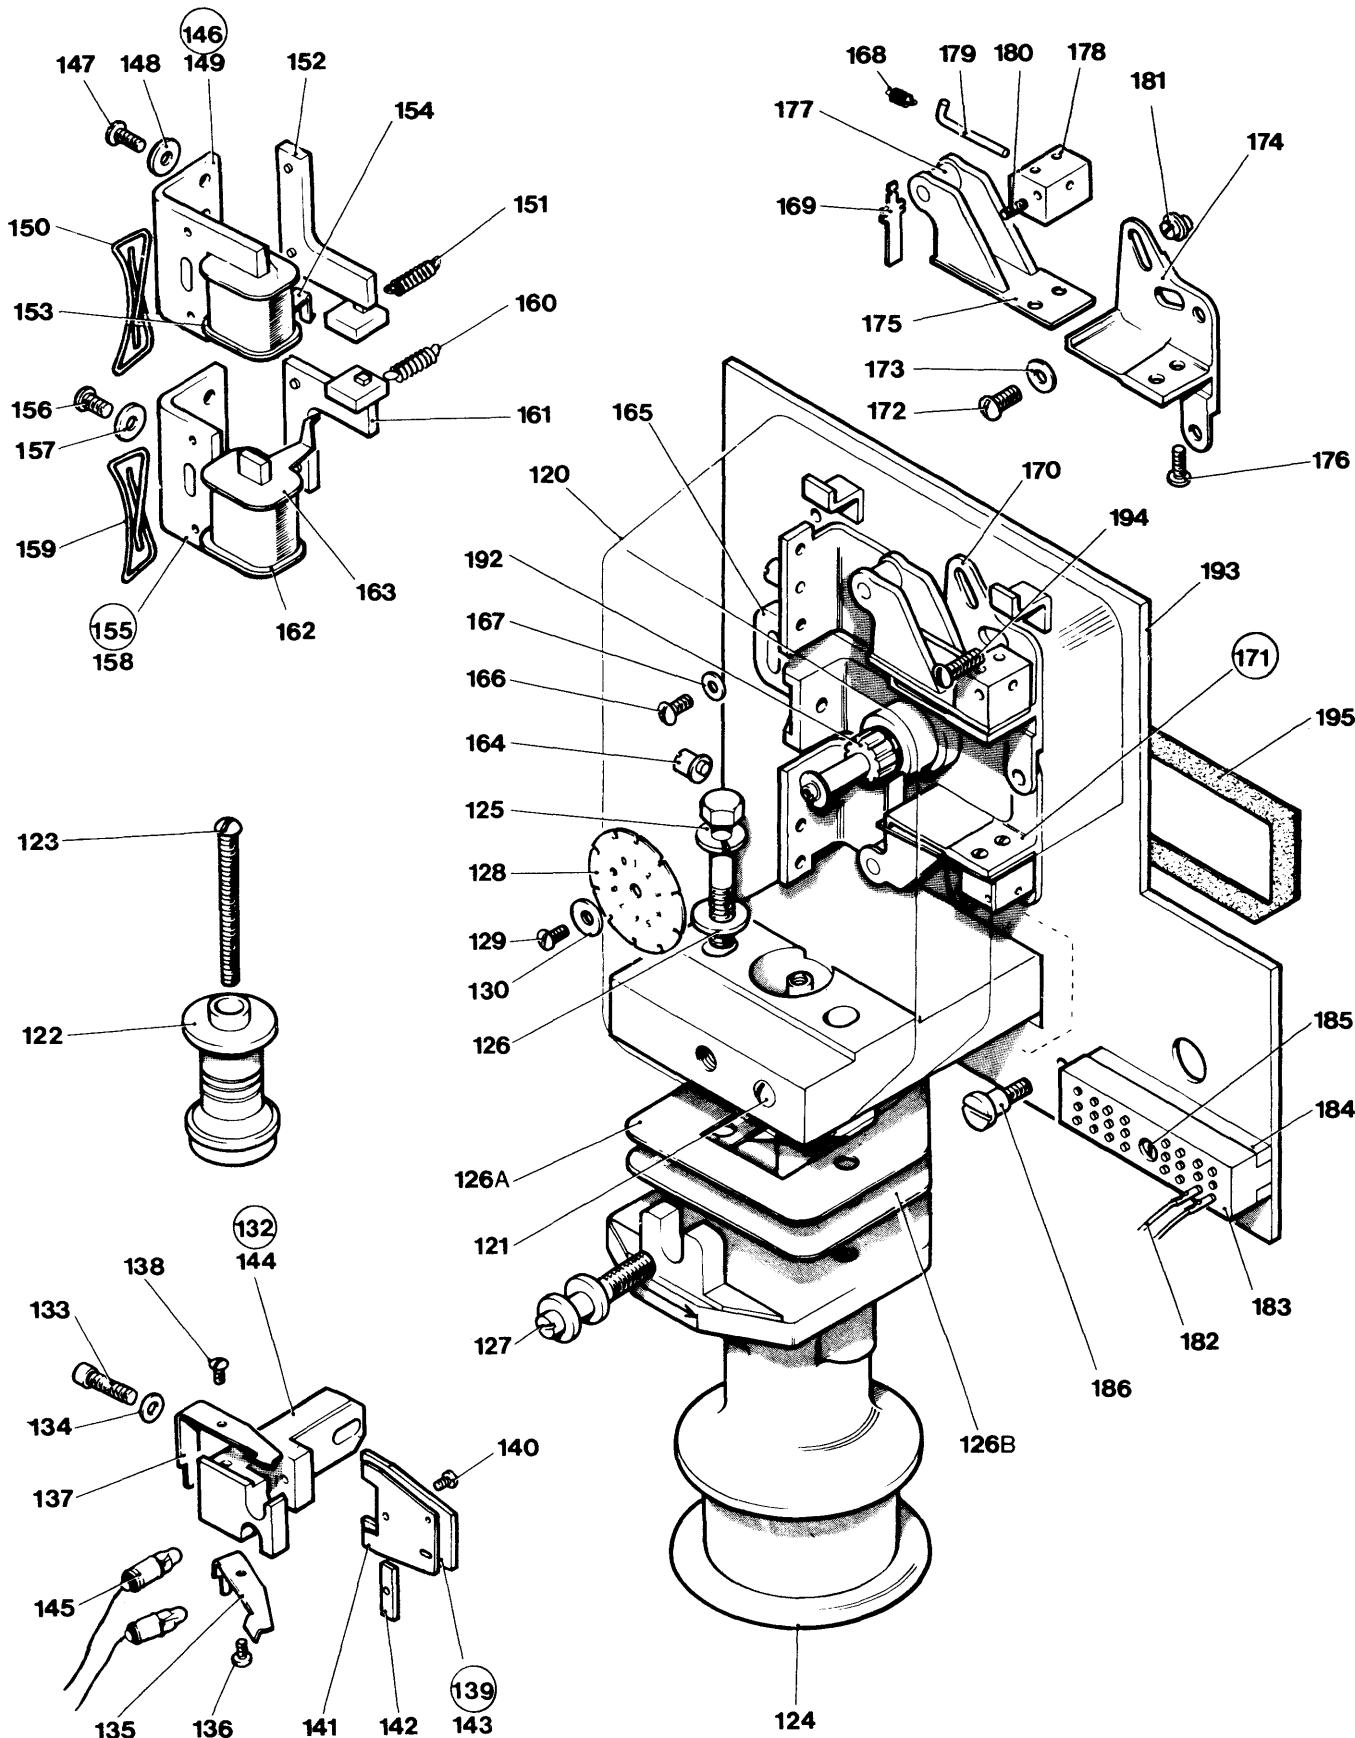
ACTUATOR ASSEMBLY (PART 3 OF 3)
